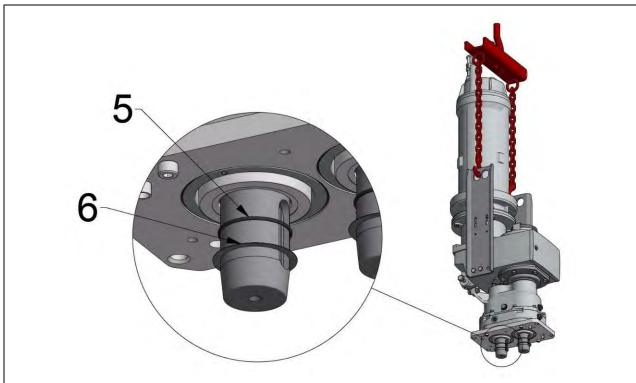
Cartridge mechanical seal with installation/disassembly tool
